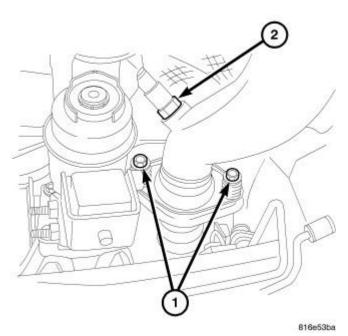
Steering Gear Heat Shield & Bolts Courtesy of CHRYSLER GROUP, LLC
